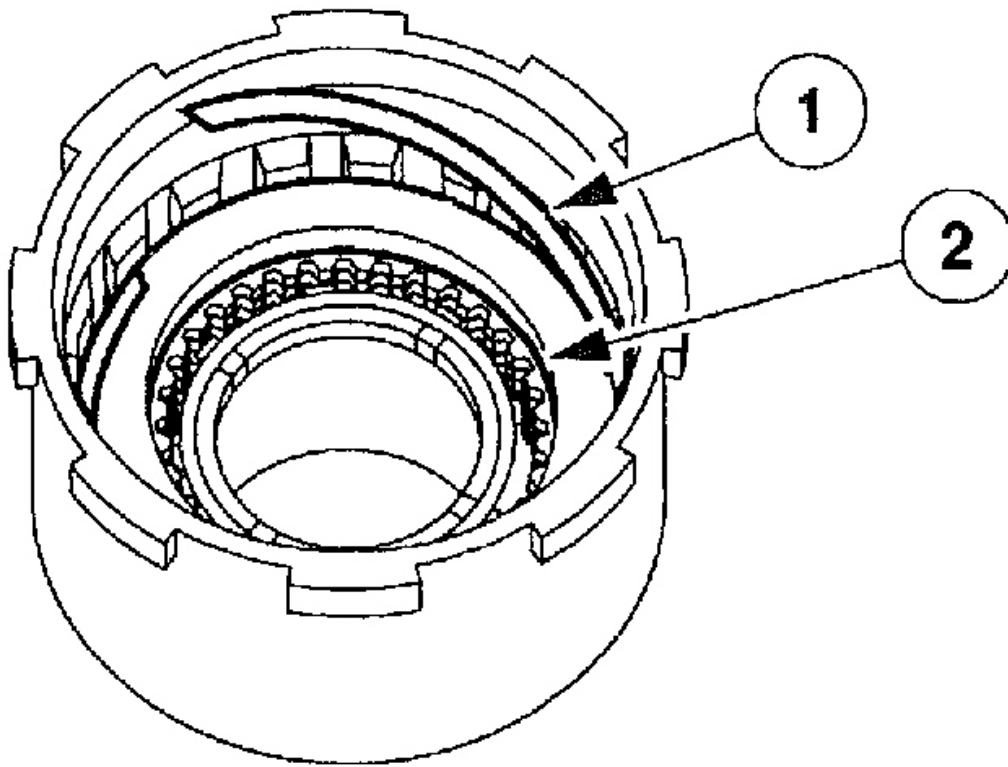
Direct Clutch Drum Assembly Component View Legend (Items 1-5)
